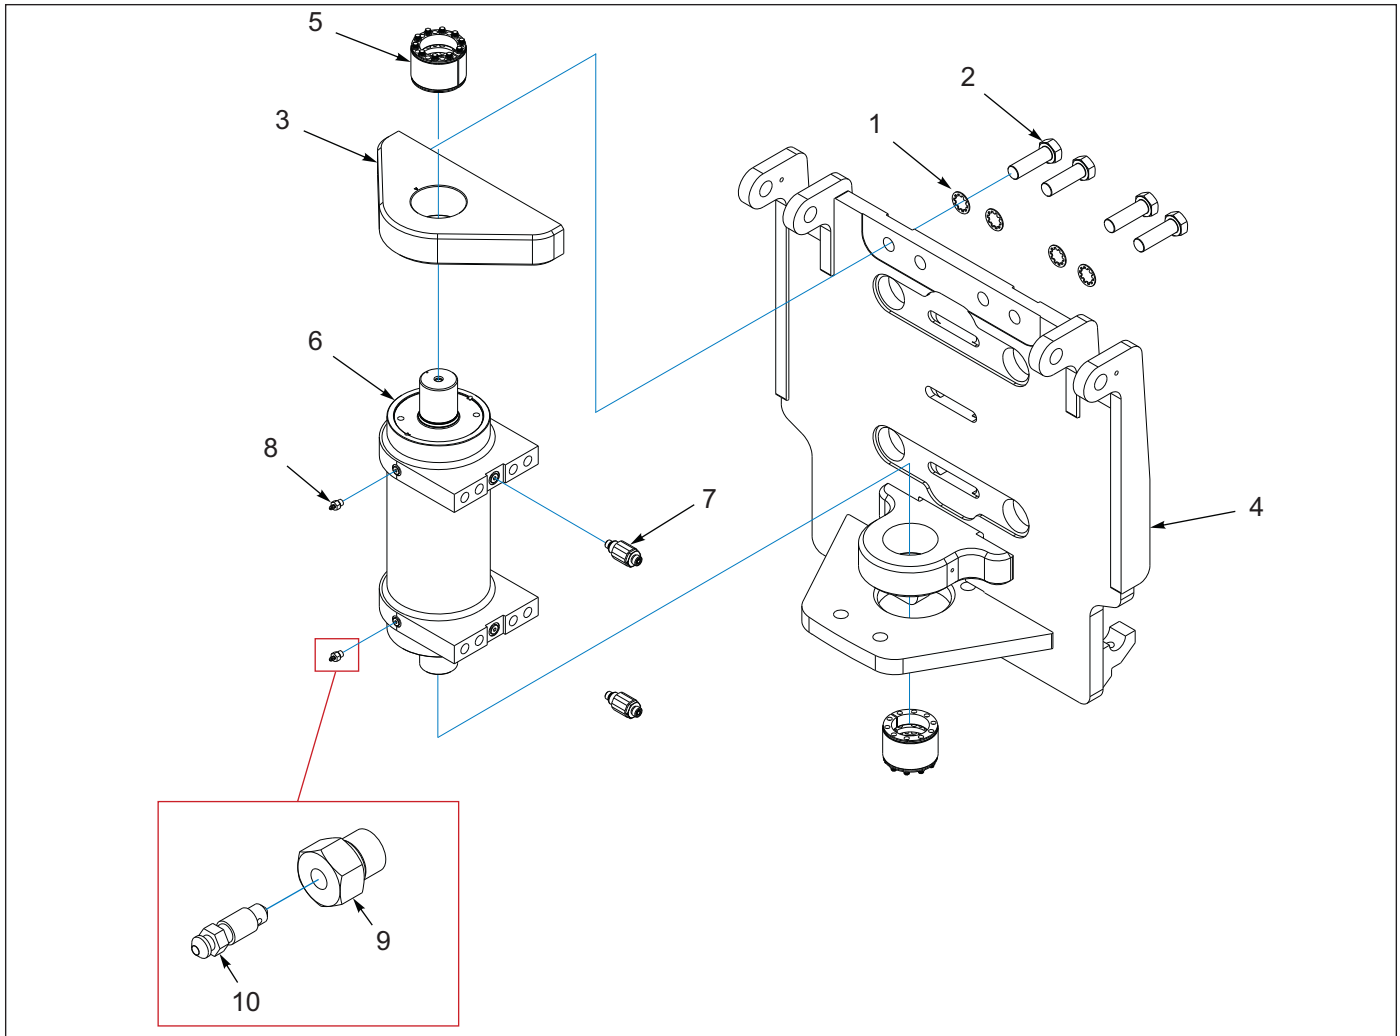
Front Plate Assembly (B30 - After 08/01/2019) (B40, B55 - After 10/15/2018)
